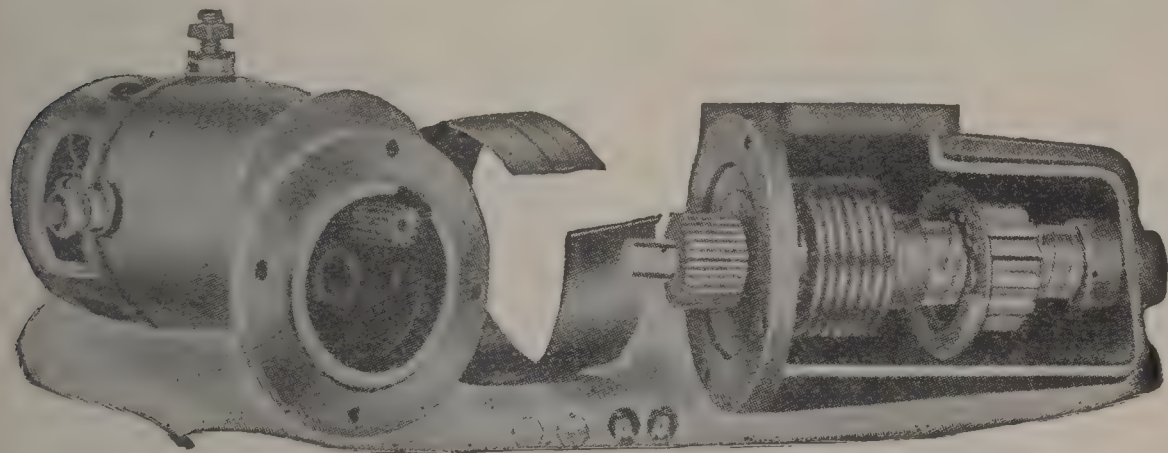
Gear reduction in which the gearing is supplied by the maker of the electrical equipment
